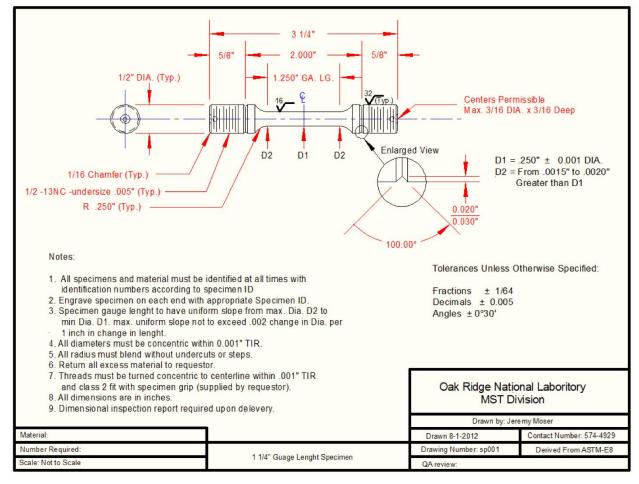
Standard tensile specimen geometry used at ORNL. Dimensions are in inches.
